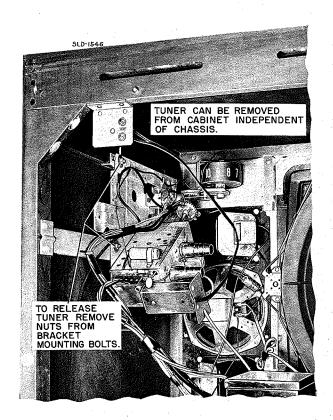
Tuner Unit Mounted on Inside of Cabinet. Additional Mounting Nut, Not Shown, Is Under Fine Tuning Knob.
